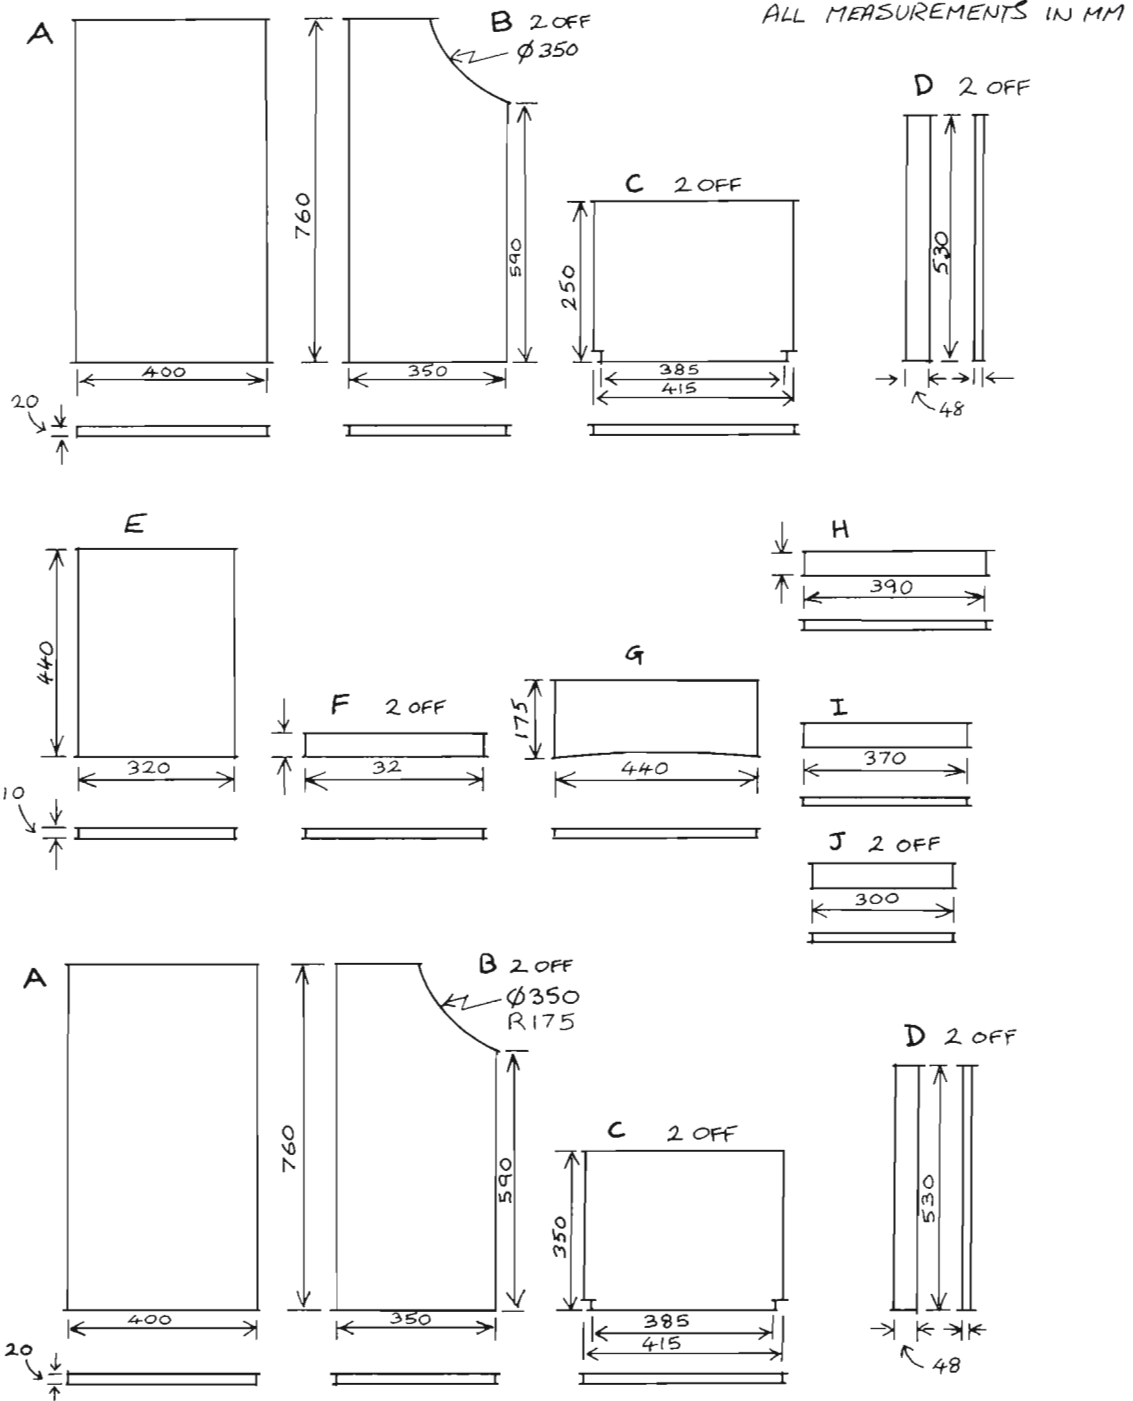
Assembly drawing for a hospital bedside cabinet.
